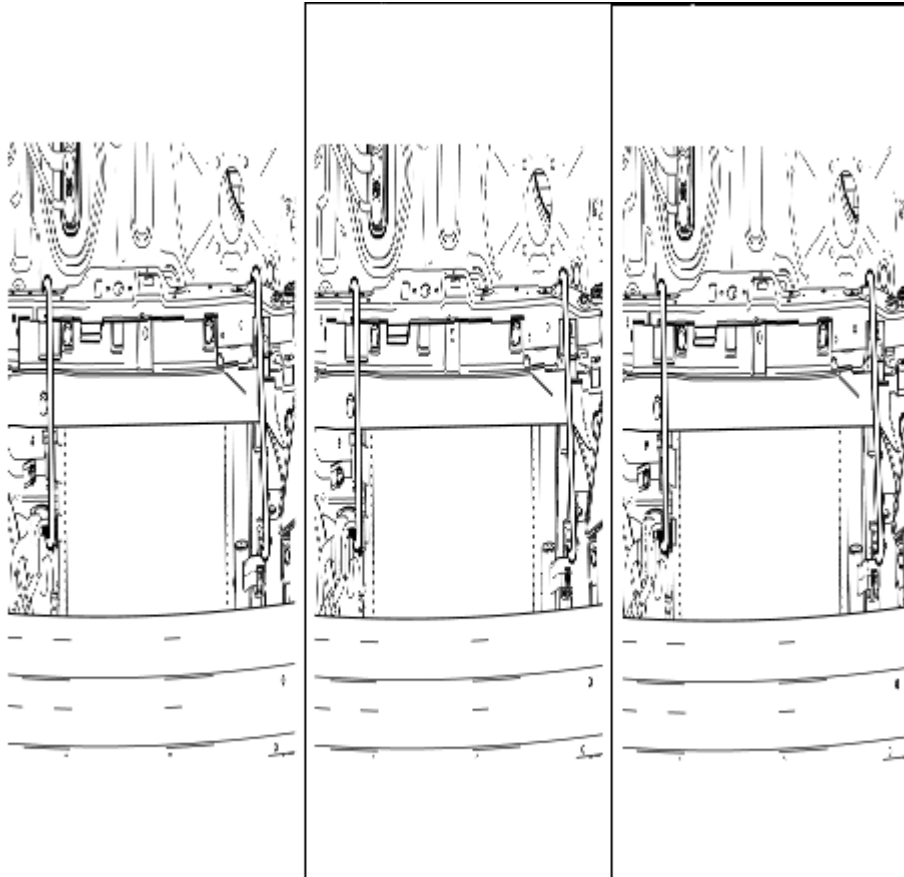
Securing Cooling Module To Left And Right Of Upper Body Structure With A Wire
